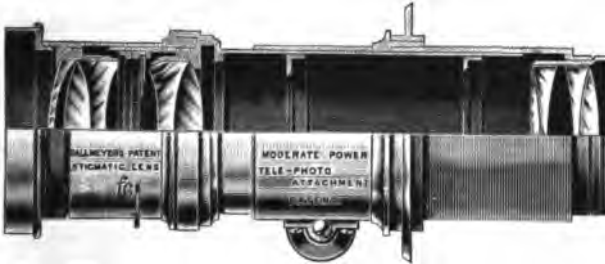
Construction of a Telephoto Lens (Dallmeyer).
